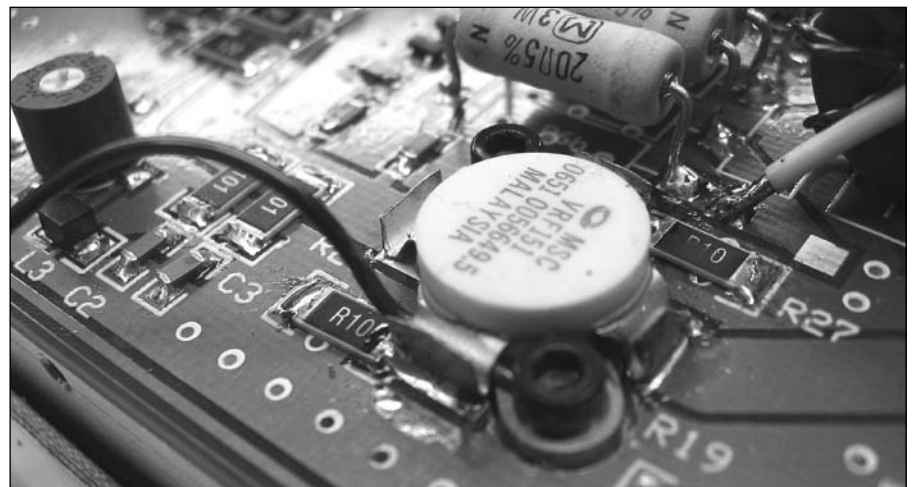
It’s important to make sure that the VRF151 power transistors mount flush to the heat sink, without gaps or air pockets that would impede heat transfer (see text for details). Once the transistors are mounted, a piece of wire is used as a lead forming device to bend the transistor leads down to the PC board pads for soldering.
